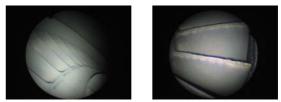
Turbine (left) and compressor (right) wheels - Main Engine – port side
